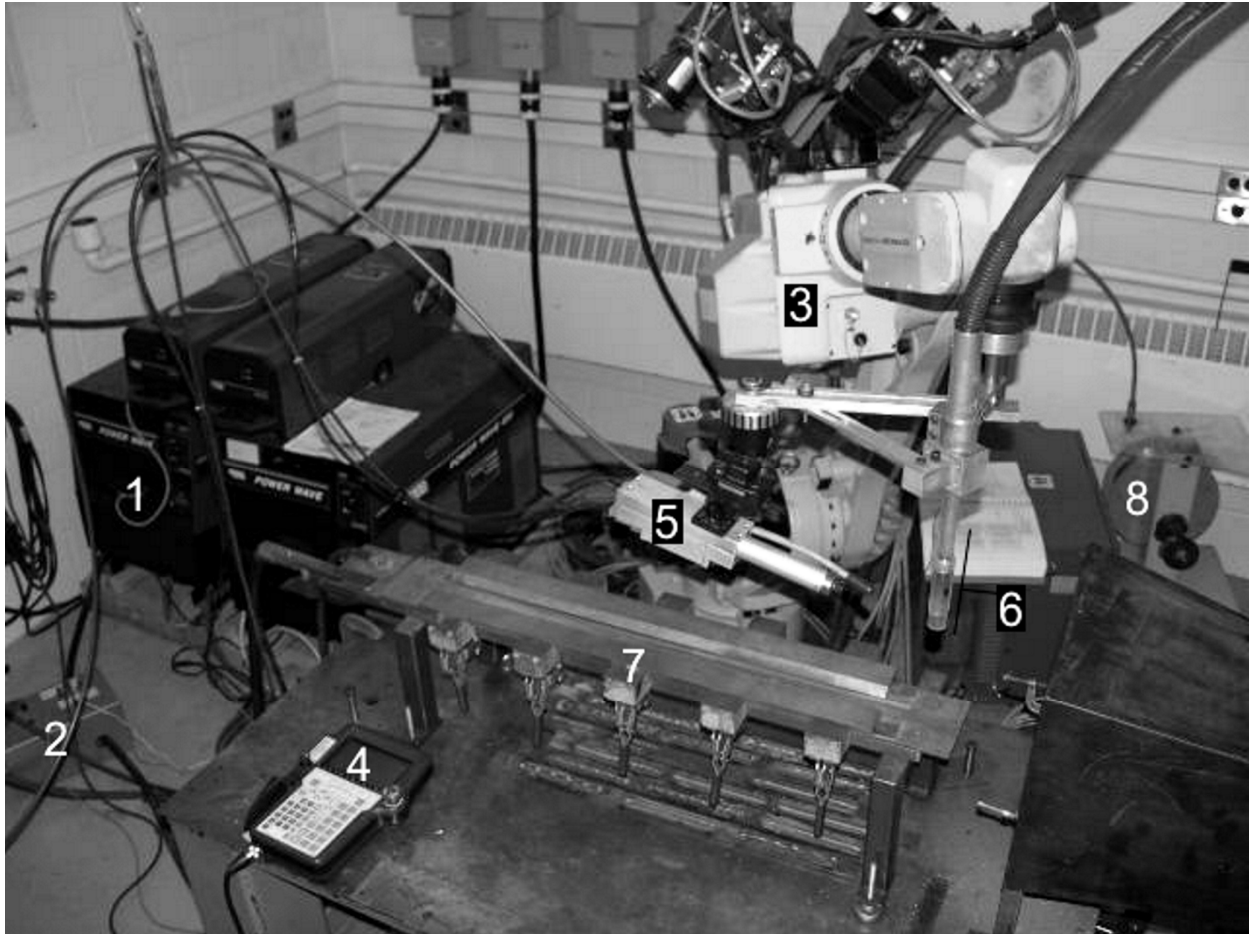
Welding setup used for the study. 1) Lincoln Powerwave 455/R Welding Power Supply 2) Data Acquisition Main Terminal 3) Fanuc Arcmate 120i 6-axis Robot 4) Fanuc Remote Controller 5) Laserstrobe High-intensity video camera and Nitrogen Strobe Laser 6) GMAW Torch 7) Workpiece Welding Table and Clamping Fixture and 8) Filler Wire Spool.
